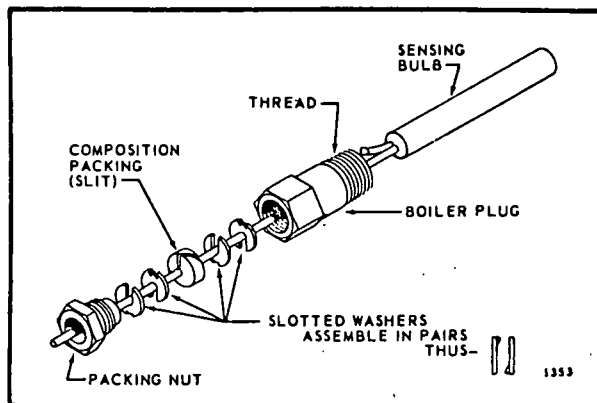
COMPRESSION FITTING FOR PRESSURE TIGHT MOUNTING OF SENSING ELEMENT.
